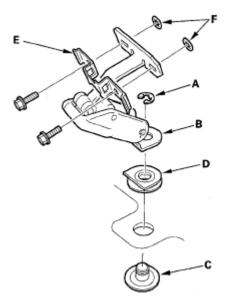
Removing Glass Lock, Lock Pin And Rubber Seal From Glass Courtesy of AMERICAN HONDA MOTOR CO., INC.
